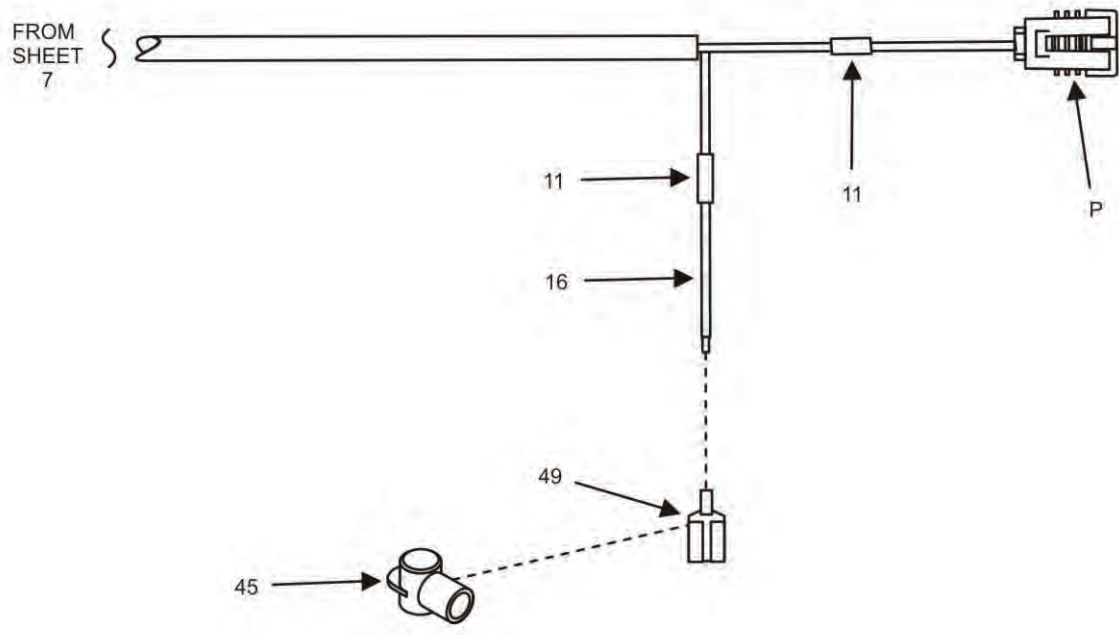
Engine Wiring Harness (Sheet 8 of 13).
